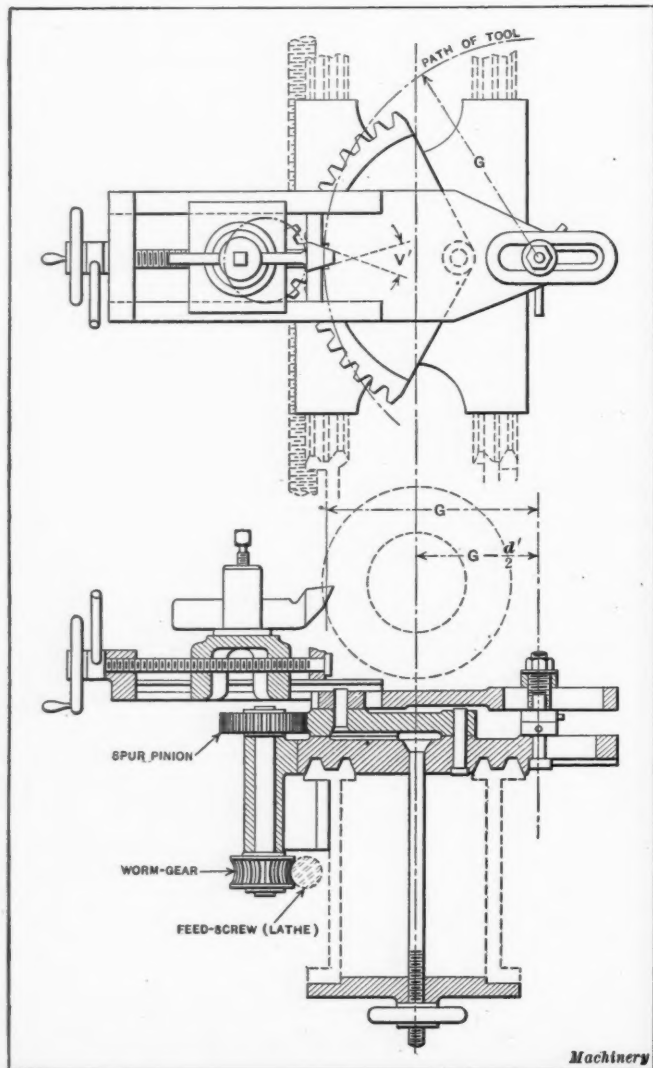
Special Fixture for cutting Internal Worms and Hobs
